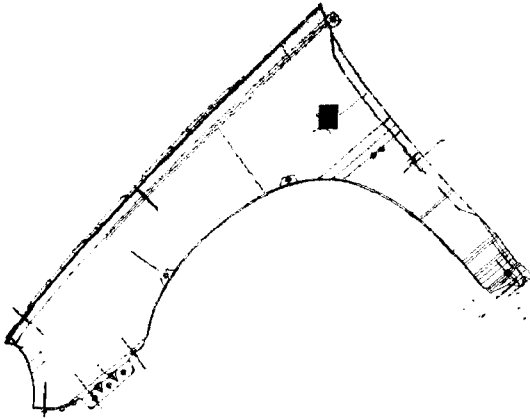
A Deformed Shape using Pro-Engineer after Data transfer within IGES
